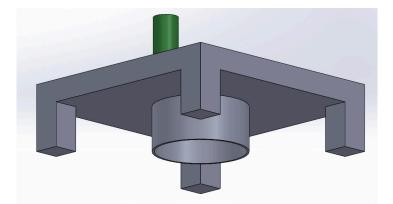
/5b: Biopsy Jig CAD model, demonstrating biopsy punch (green) through symmetric holes
